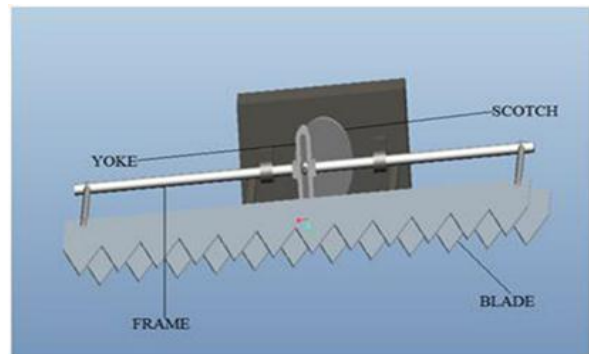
Scotch Yoke Mechanism and blade assembly [6]
